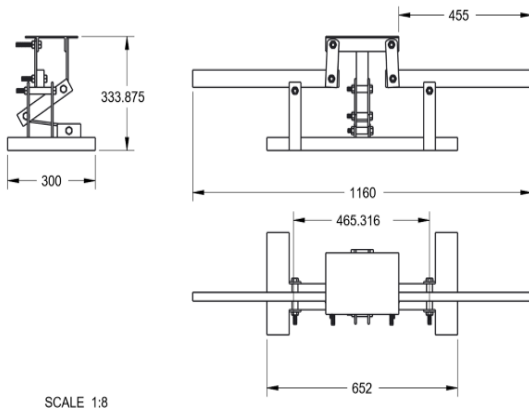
Orthographic projection of the push plank fitness equipment assembly with dimensions in millimeters.
